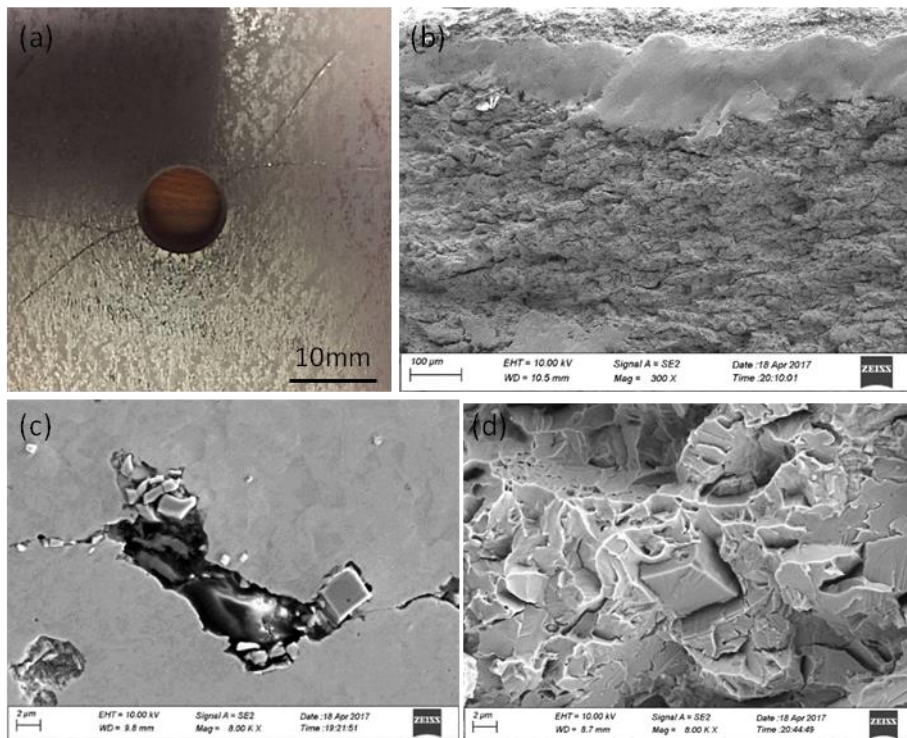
Surface crack and fracture surface of a hole expansion specimen (FRT:810°C/ CT:610°C) with 0% HER: (a) the cracks appearing on the rolling surface, (b) the fracture surface of the cracks observed in the rolling plane, and coarse TiN precipitates observed in the (c) rolling plane and (d) fracture surface.
